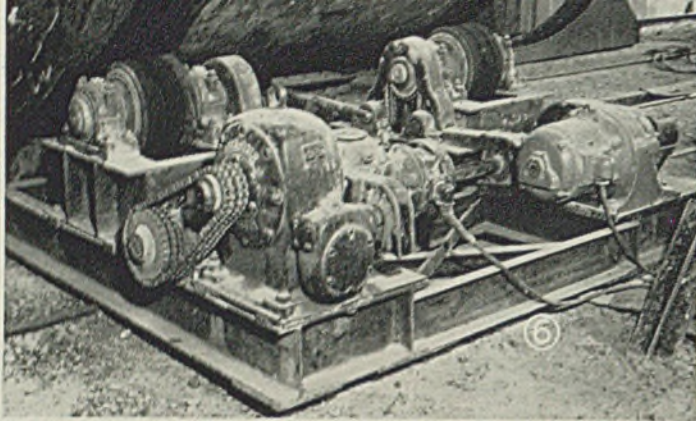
This is the automatic rotating machine made by Link Belt to slowly turn the penstock sections while the circumferential welds are being made
